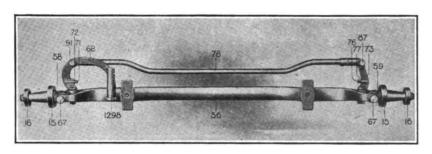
FRONT AXLE AND STEERING KNUCKLES
